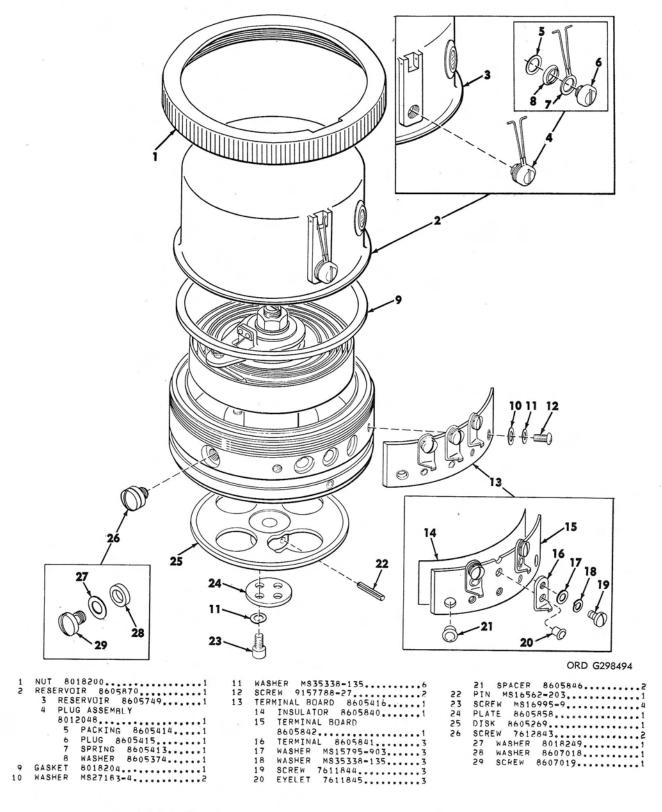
RESISTOR, DROPPING /8008662/-PARTIAL EXPLODED VIEW /SEF FIGURES 130, 141, 156, 178, 184, AND 193 FOR NEXT HIGHER ASSEMBLY/
